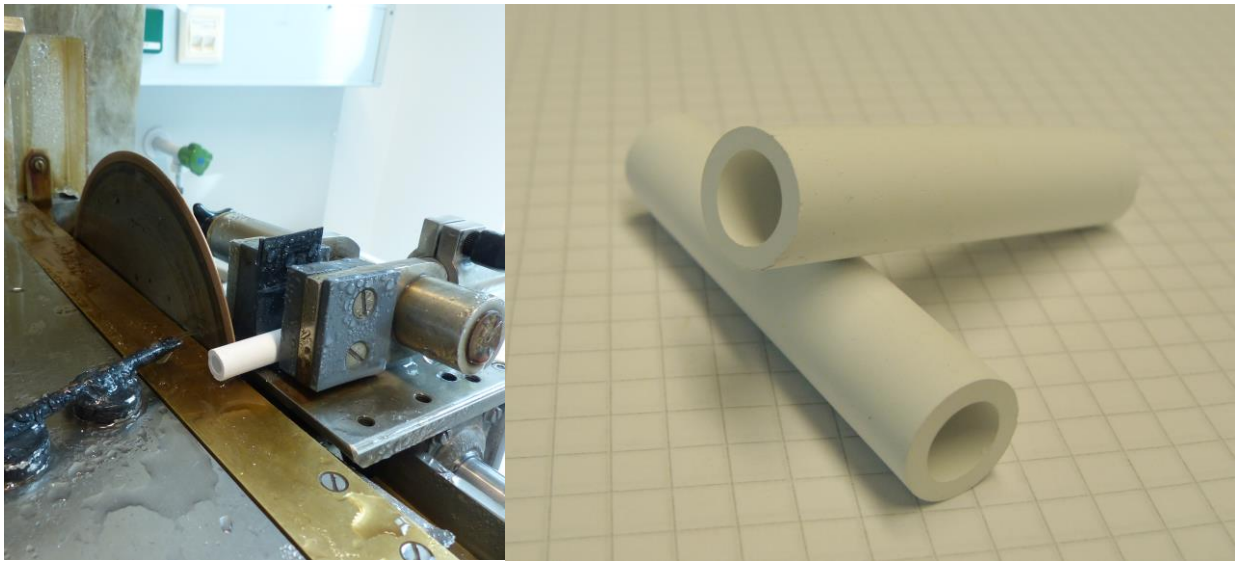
Sample placement in the cutting machine (left), Samples after shape finishing (right)
